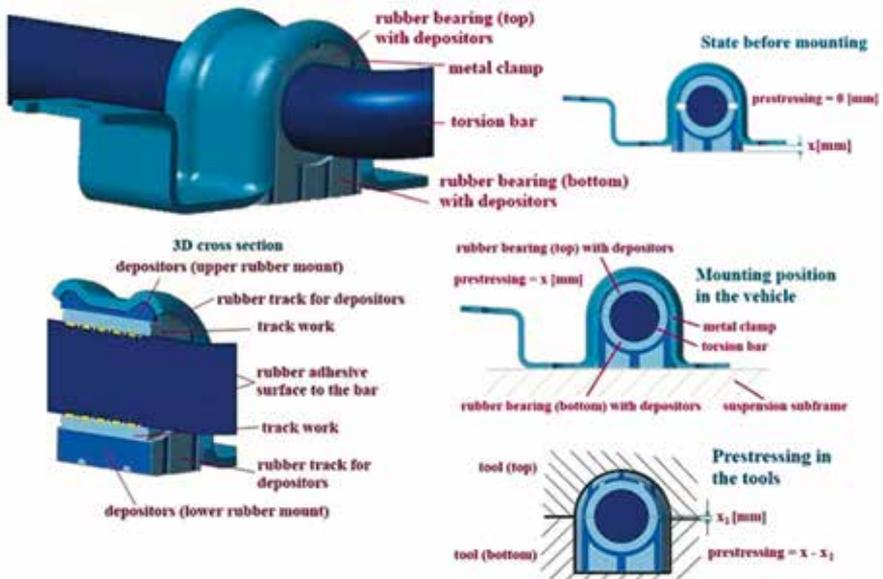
Device for the vulcanization of flexible bearings (adhesive mounting, Figs. 3 and 4) [2, 3, 9]
